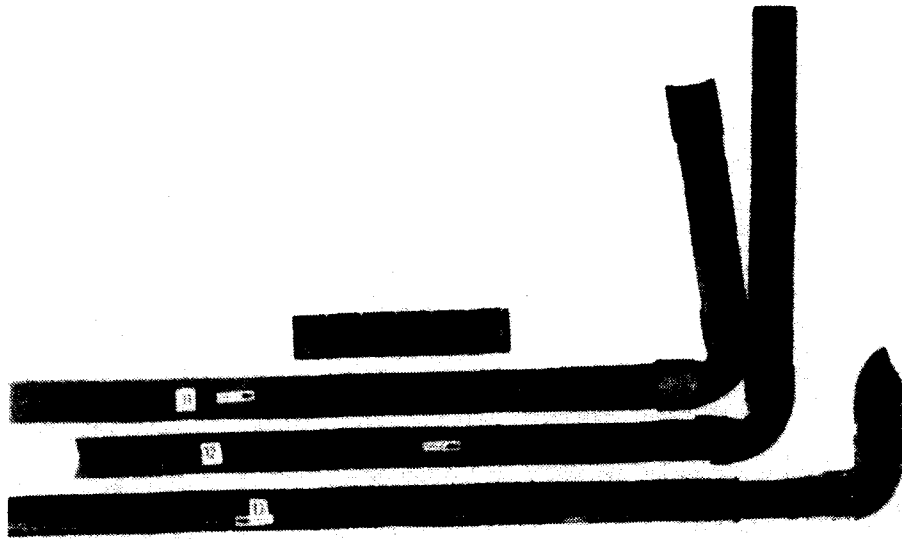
Internal Surfaces of Specimens 11, 12, and 13.
